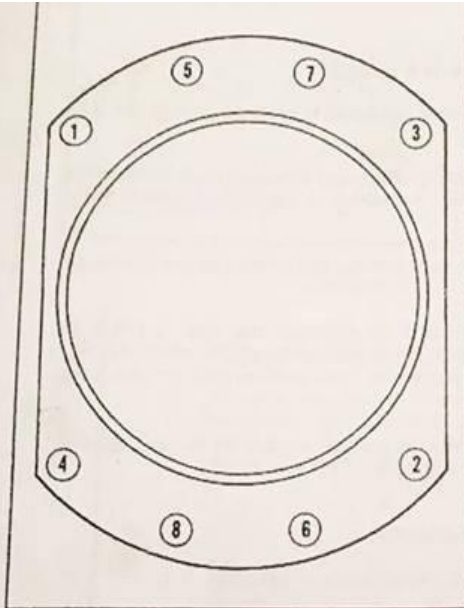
C. CYLINDER FLANGE TORQUE SEQUENCE FOR SINGLE CYLINDER INSTALLATION.
